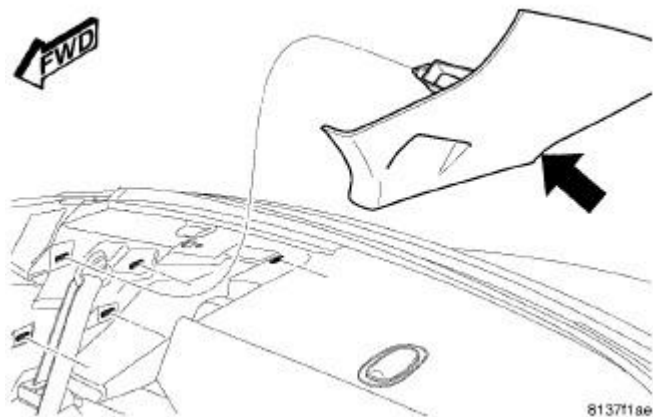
Removing/Installing Upper C-Pillar Trim Panel
